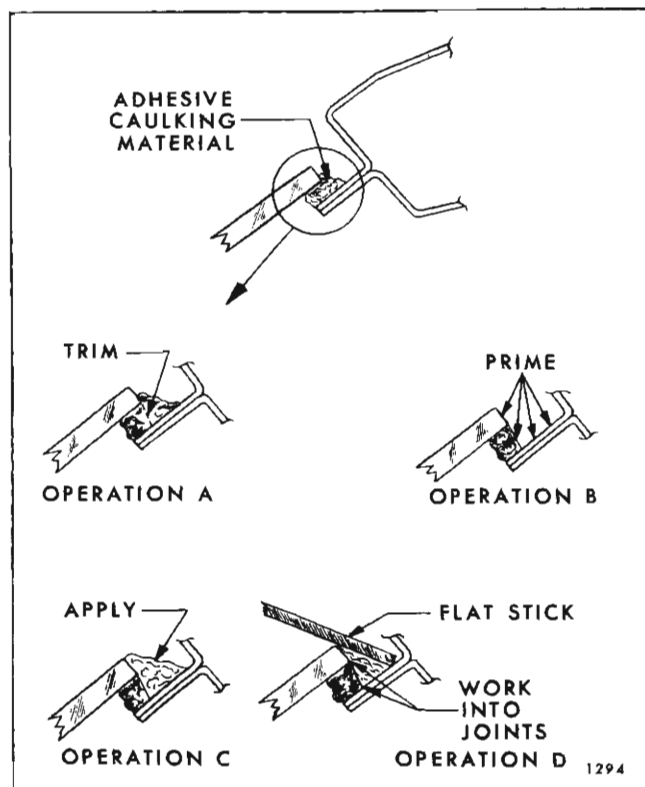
E13—Correction of Adhesive Caulked Glass Installation Waterleaks
